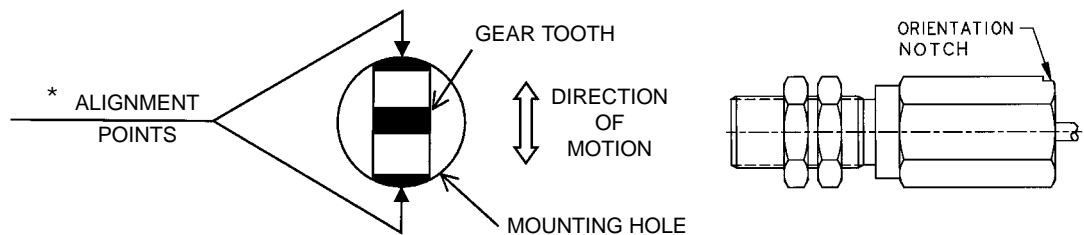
Sensor Mounting & Orientation in Threaded Opening
